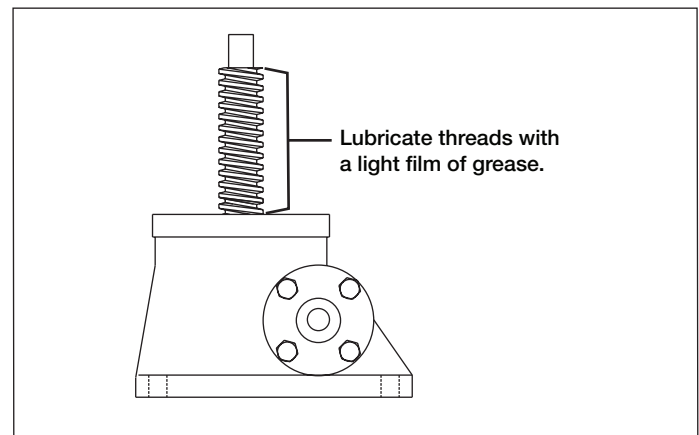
, Load Screw Thread Lubrication (Typical - Side View)
